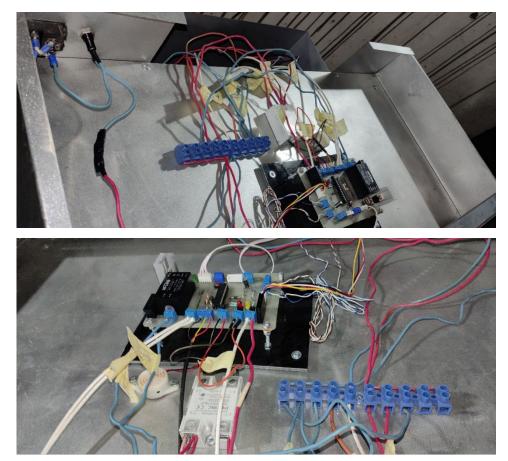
WIRING THE FINAL VERSION OF THE CONTROL UNIT WITH HER ACCESSORIES
